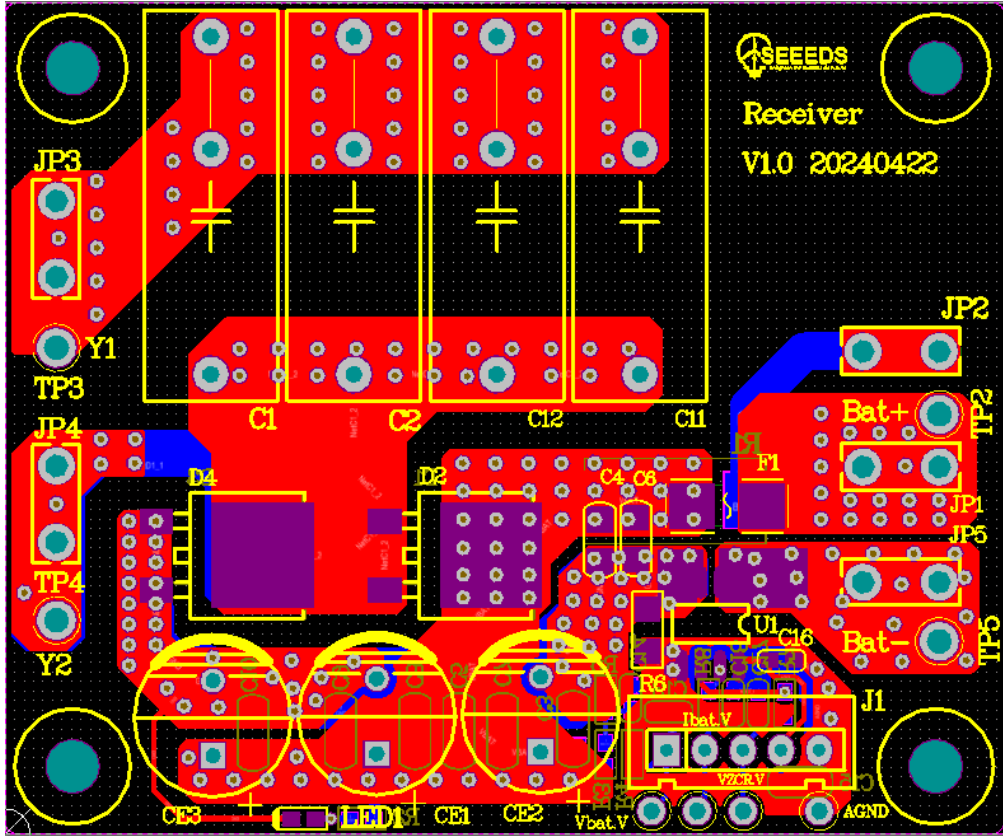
Layout PCB Design of the Circuit on the Receiver Side
